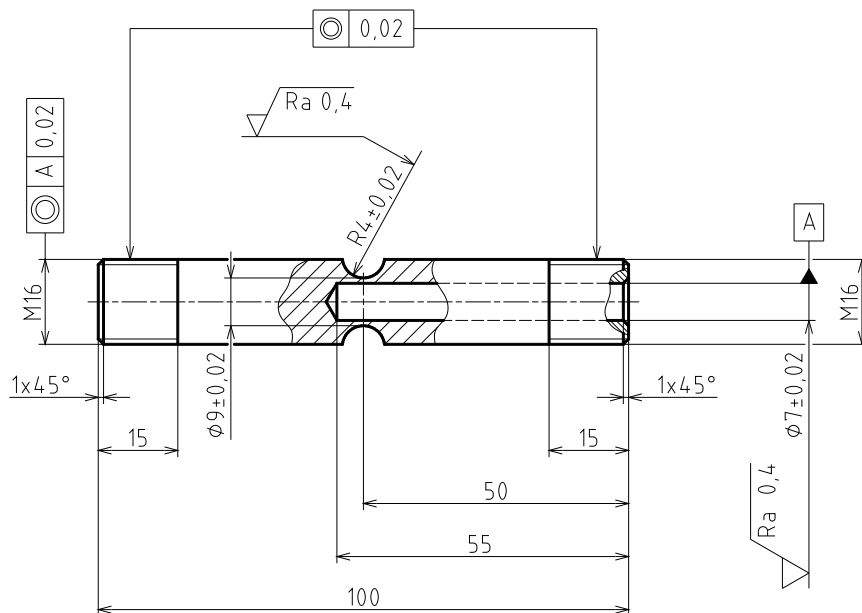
Detailed drawing of notched tubular specimen for tensile tests.
